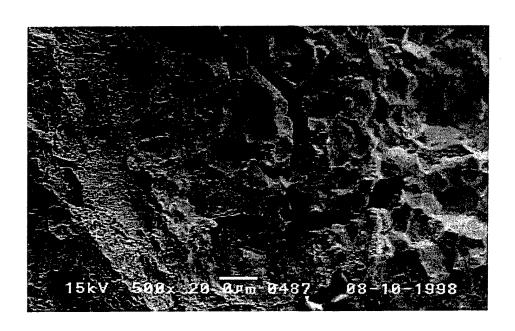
Brittle intergranular fracture surface (right) evident in the LME of ASTM A723 by Ga (mag 500x).
